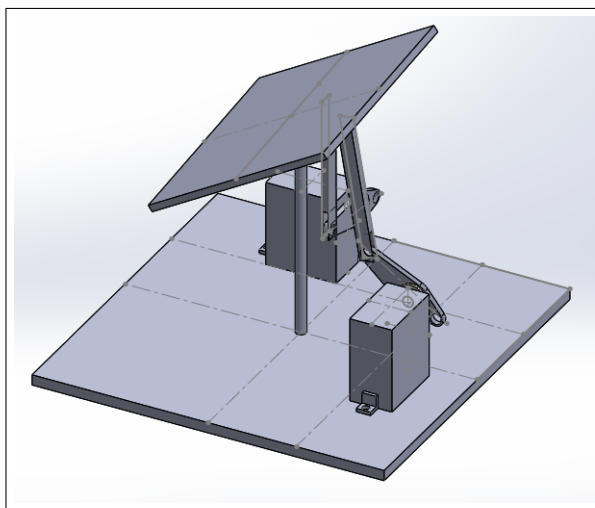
CAD design, AU ball on plate balancing robot isometric view
